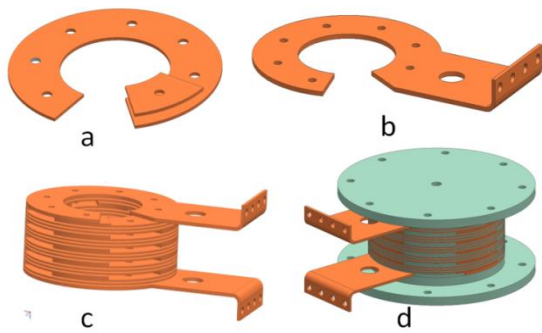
Bitter coil components and assembly: a. Bitter plate and inter-leaving plate, b. Top and bottom plates (Connecting Plates) c. bitter plate assembly (conducting plates) d. complete assembly.
